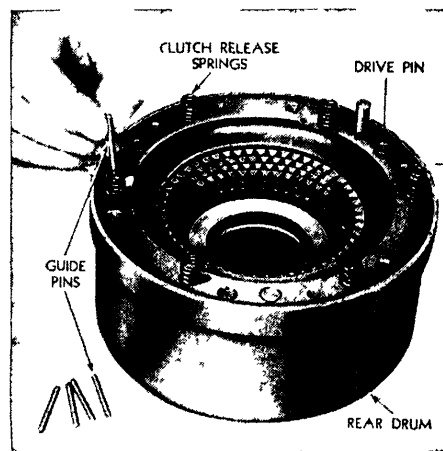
Install inner and outer clutch release springs into recesses in piston. Then install spring guide pins
